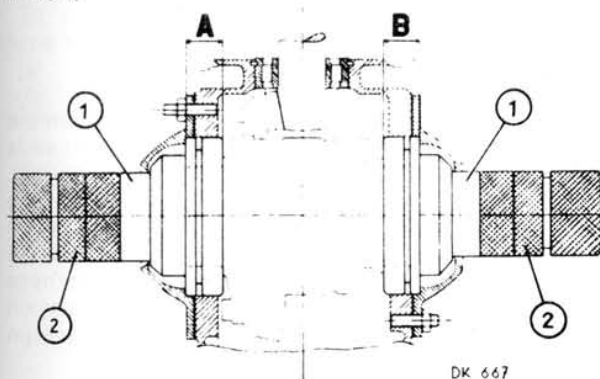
/2 - Determination of space required for tapered roller bearings and shims
